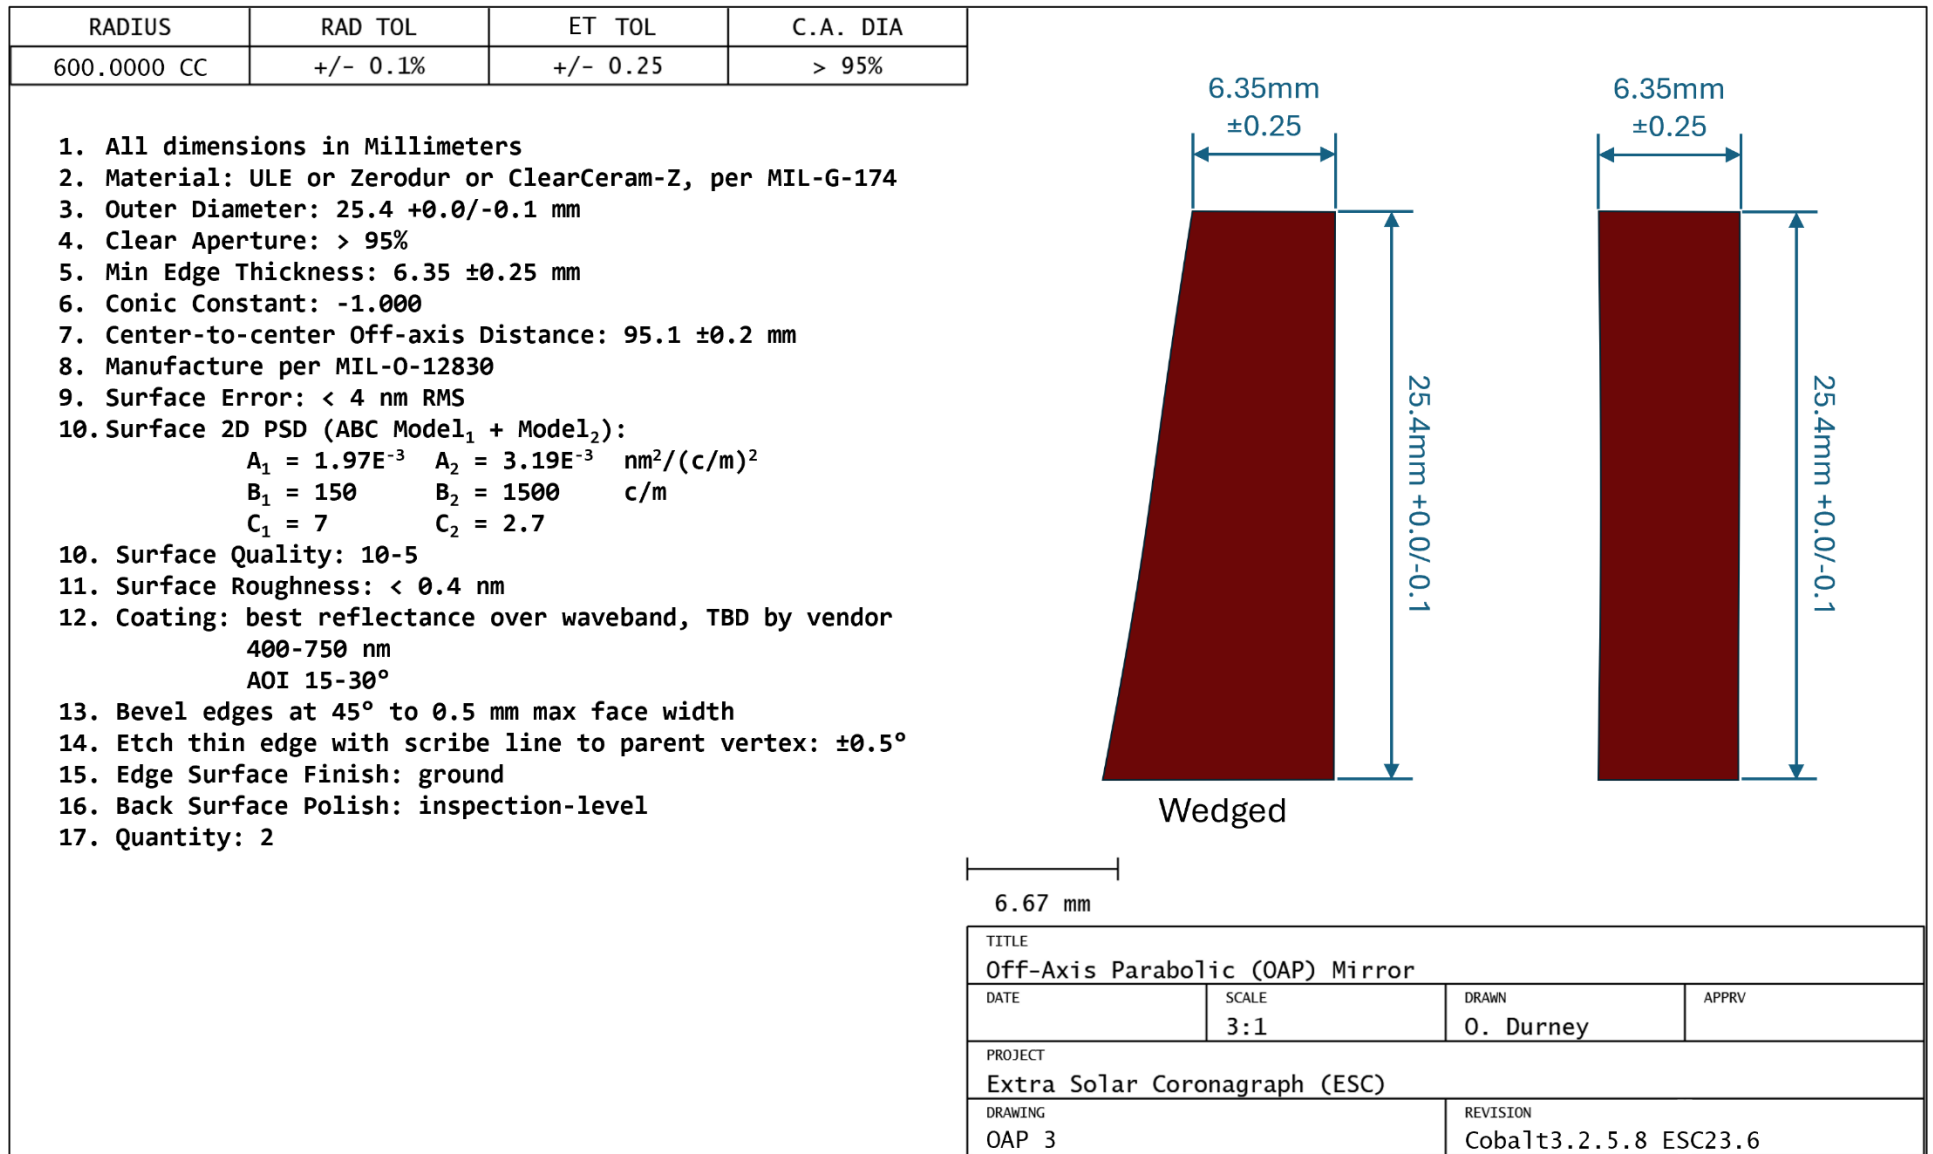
Off-axis parabolic mirror, OAP 3 drawing
